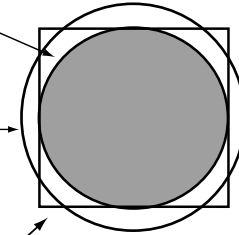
Footprint - 5 mils stencil - non solder mask defined
